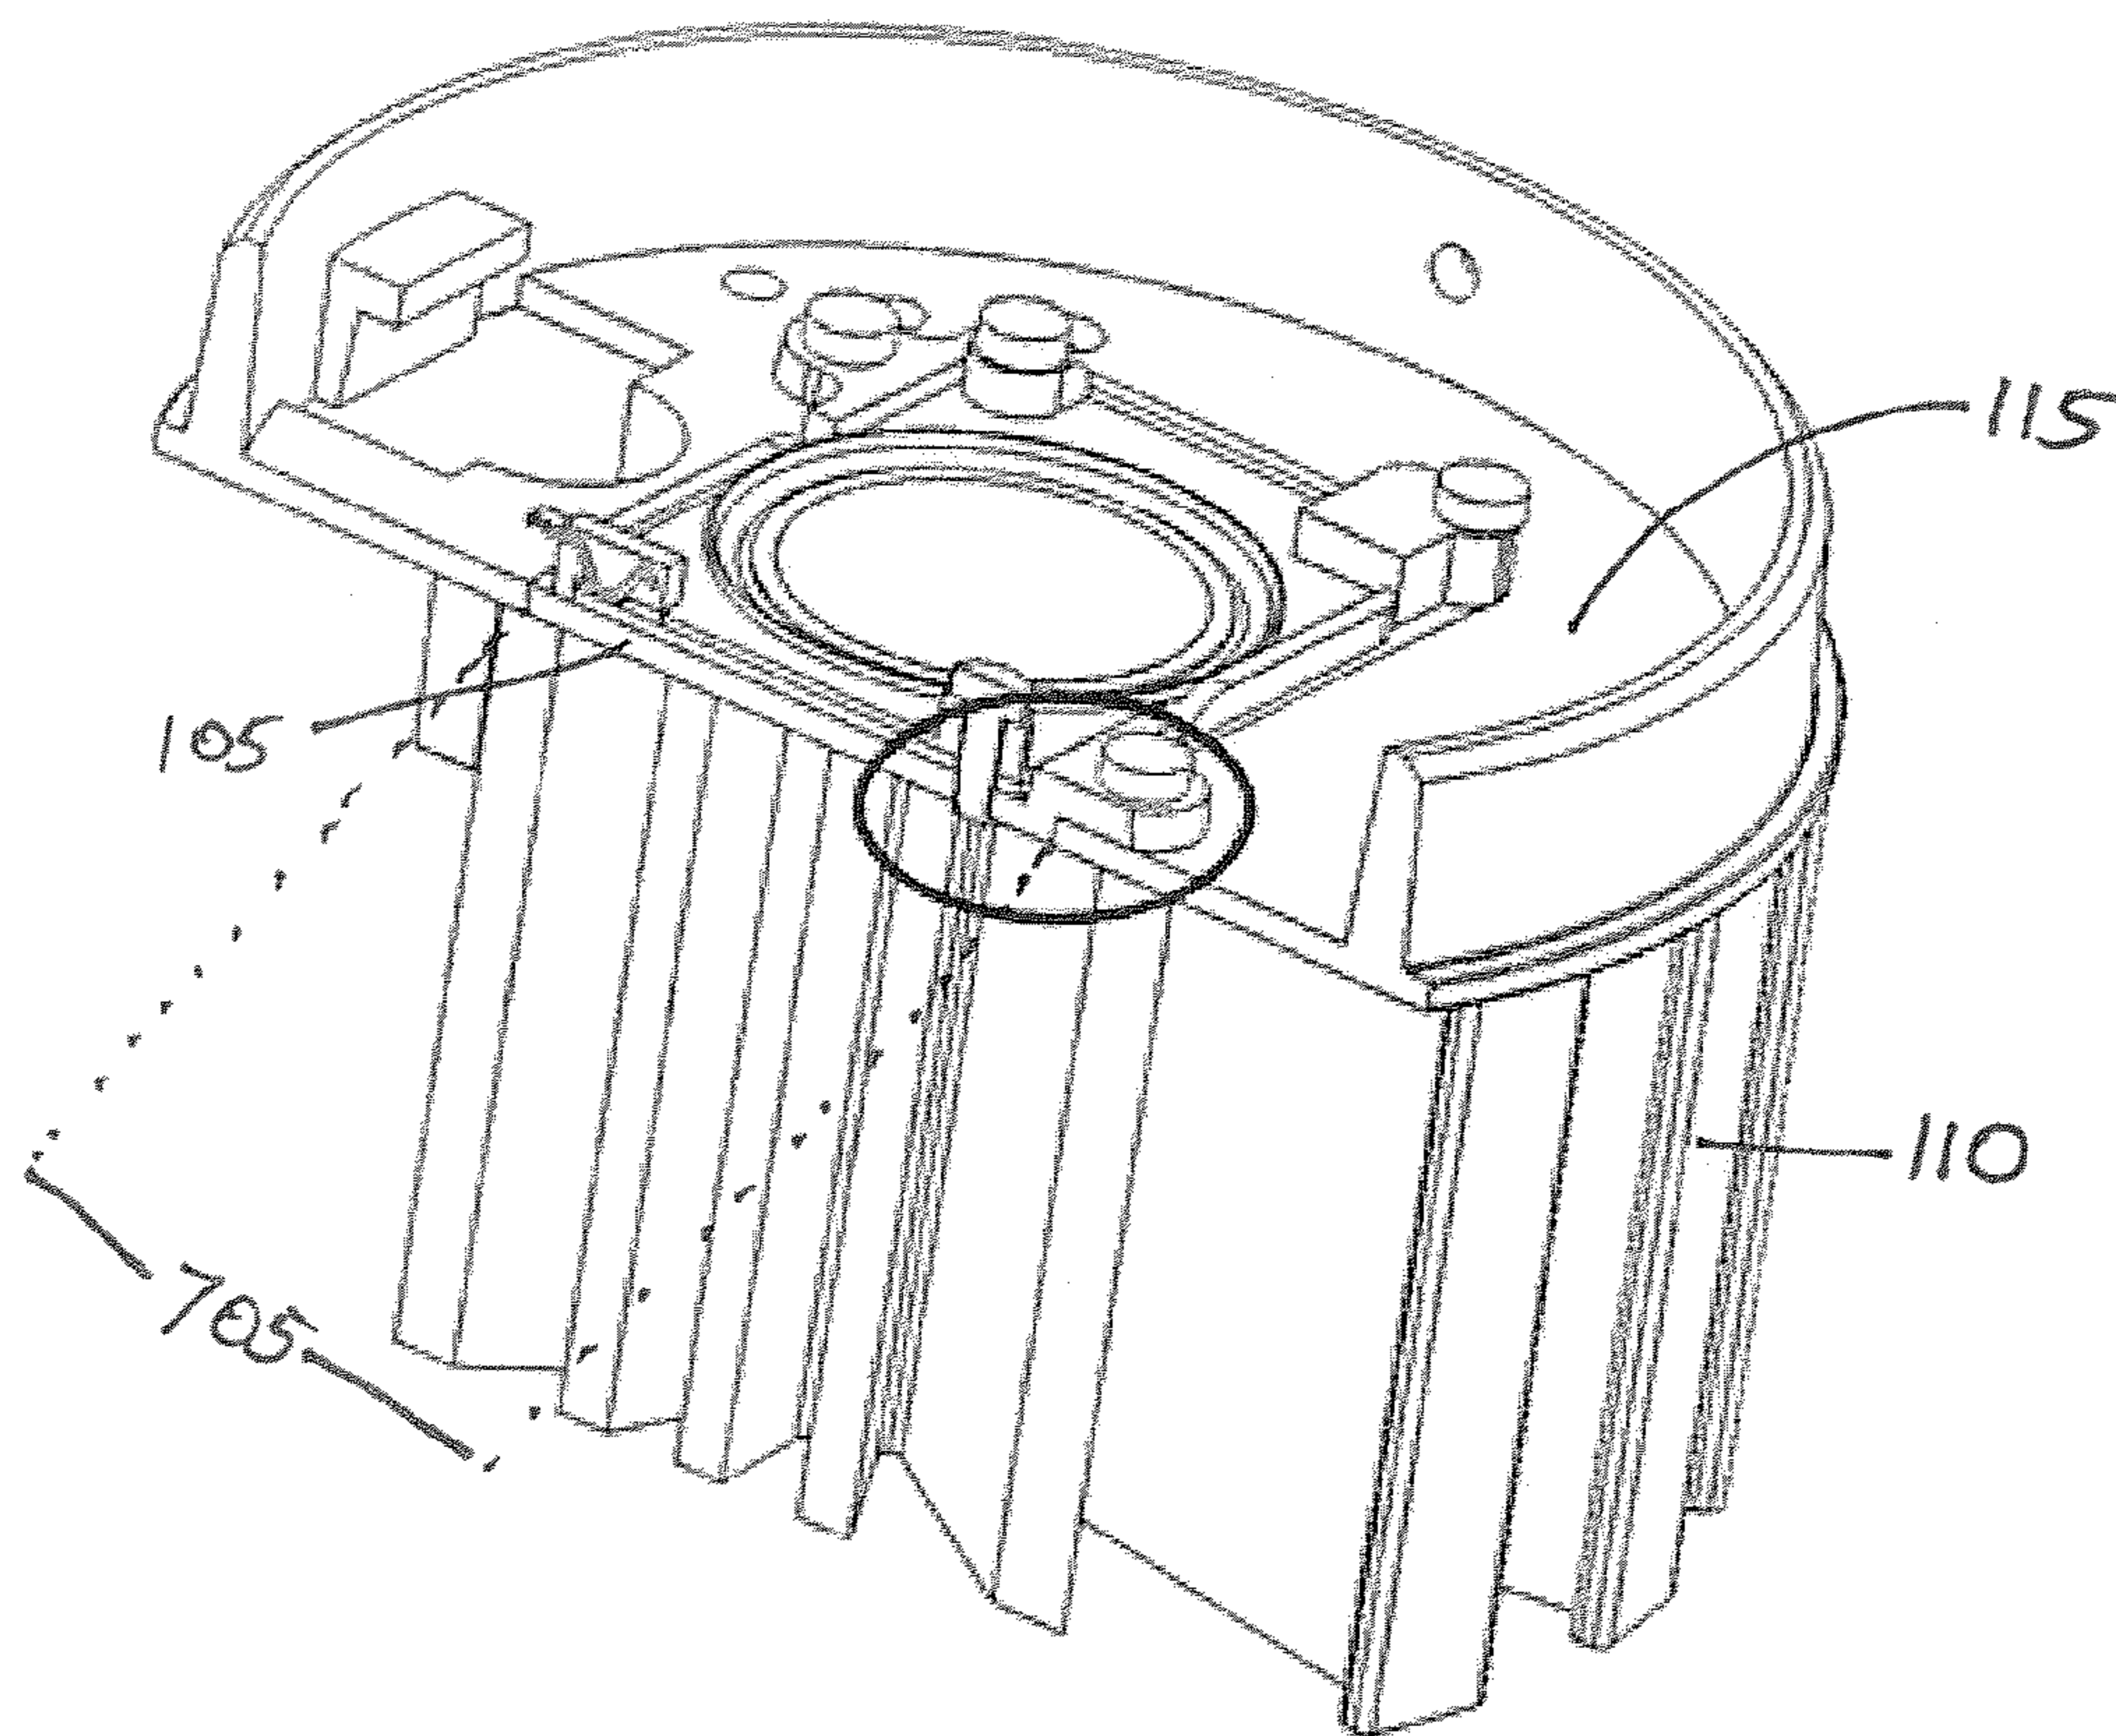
LED Holder, Section View illustrating LED Holder nesting within Heatsink
